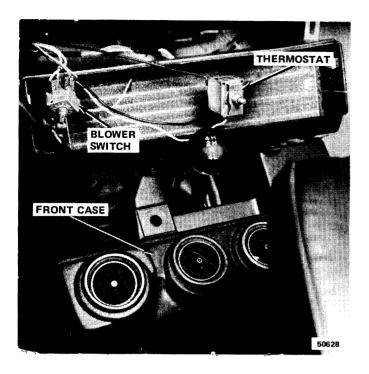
Blower Switch and Thermostat Removal—1975 CJ Models
